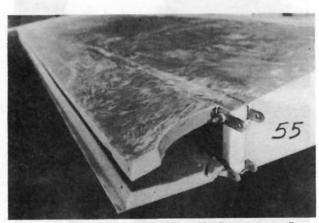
Lower surface of wing with aileron cut out. Foam cut back.
